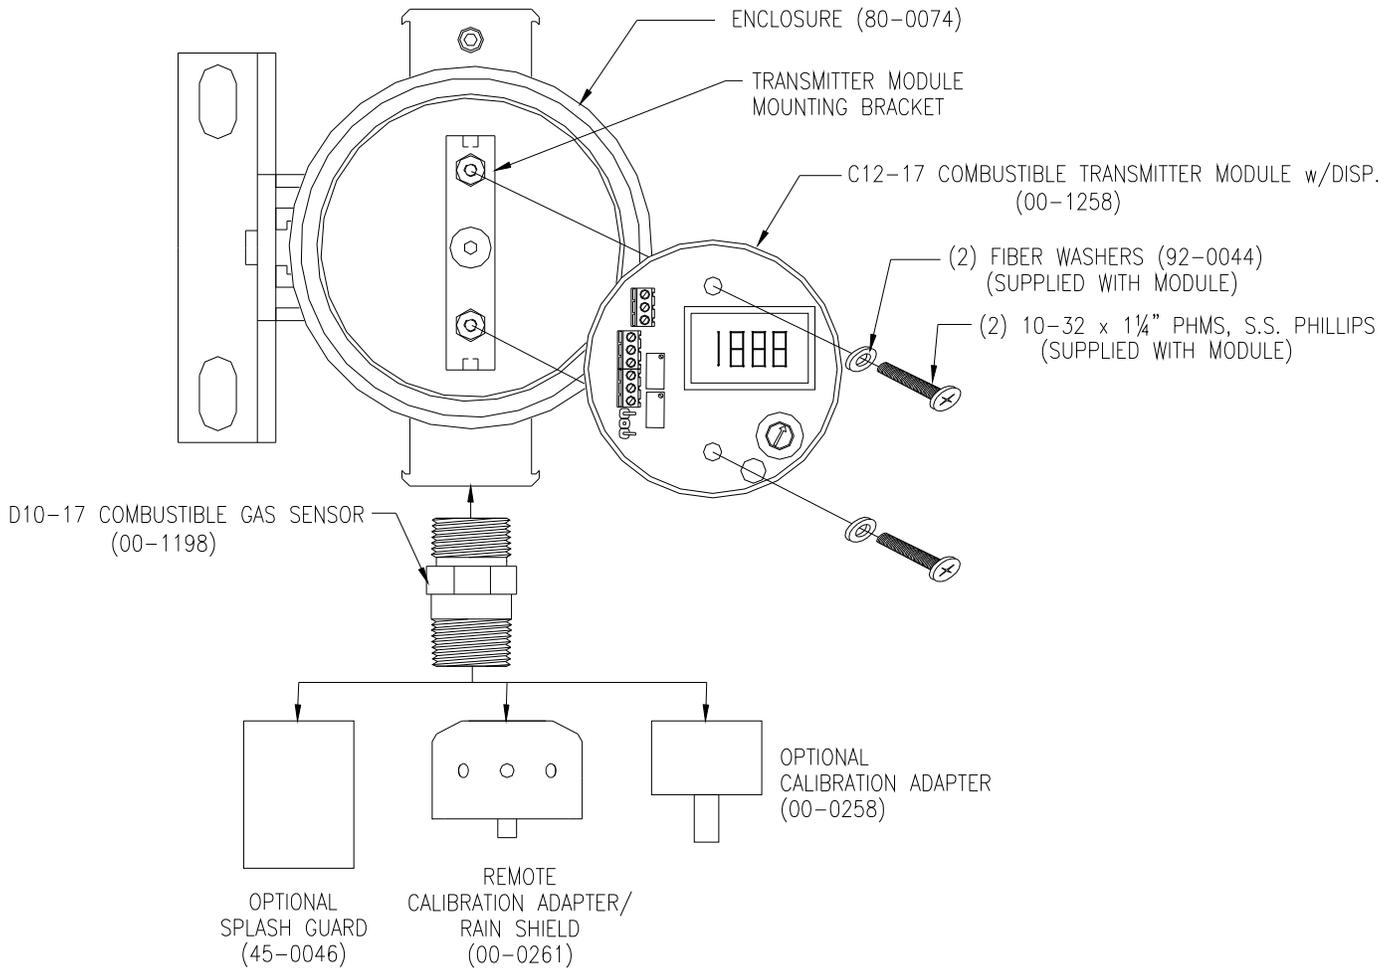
Standard Combustible Transmitter Exploded View (ATI-0571)
